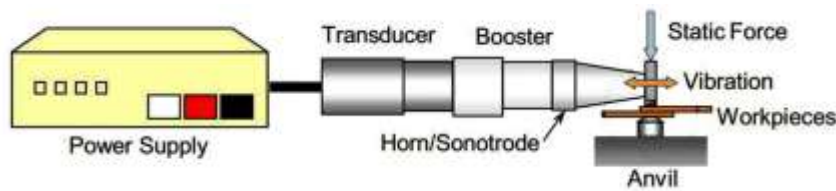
Schematic diagram of lateral drive ultrasonic metal welding system [14]
